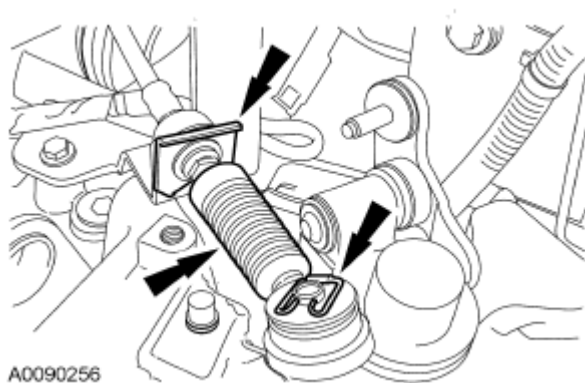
Locating Transaxle Control Cable (1 Of 2)
